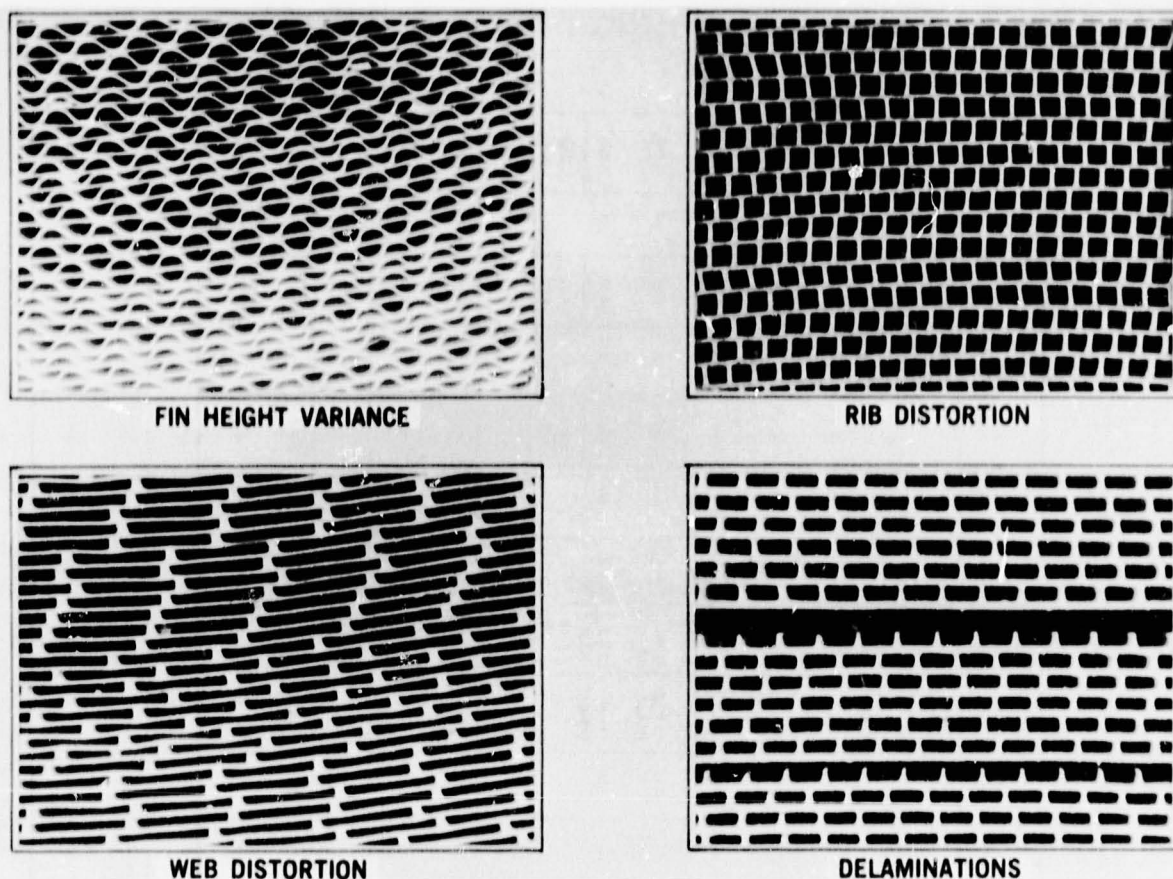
Photographs Illustrating Manufacturing Defects
